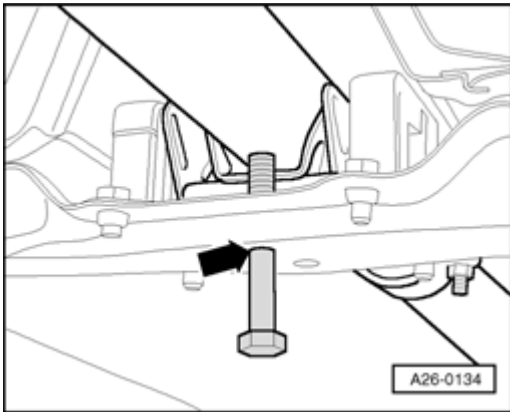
Manufactured Tool Inserted Through Rearmost Hole In Tunnel Bridge
